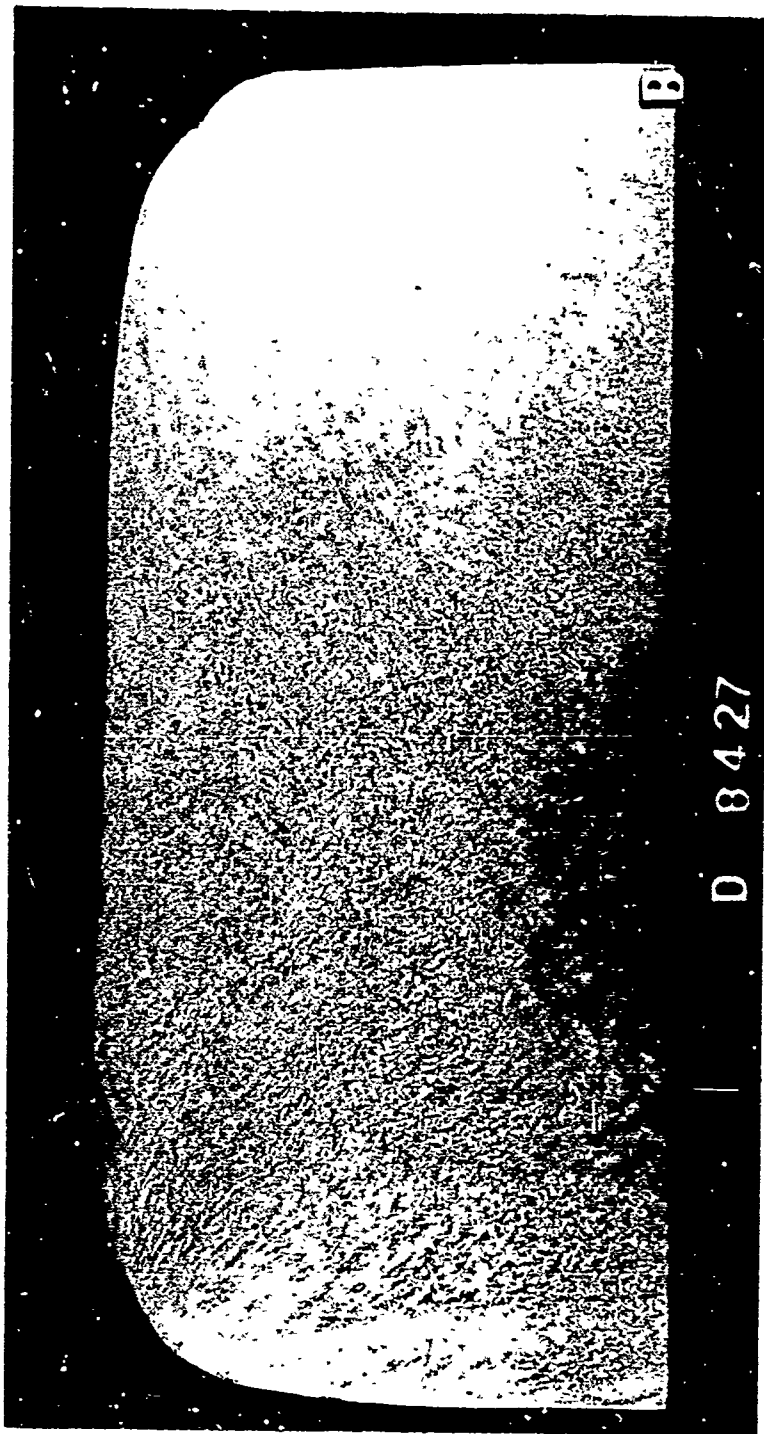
Macrosection of 7-Inch RCS Billet Stock IMI 679, Transverse - Bottom
